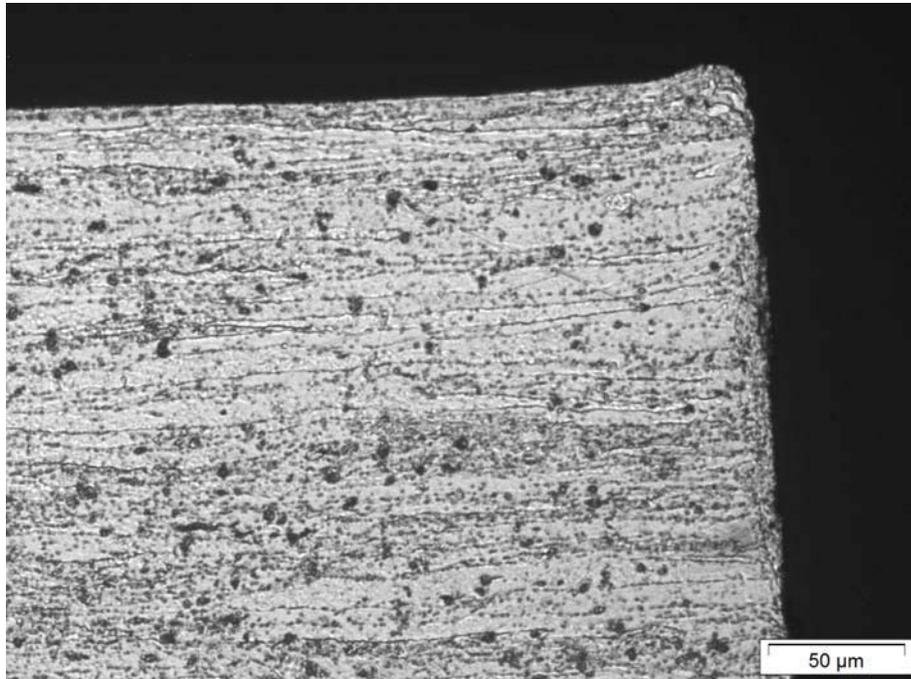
Etched cross-section view of hole entry edge, Drill D, zoomed on Figure 8.24.
